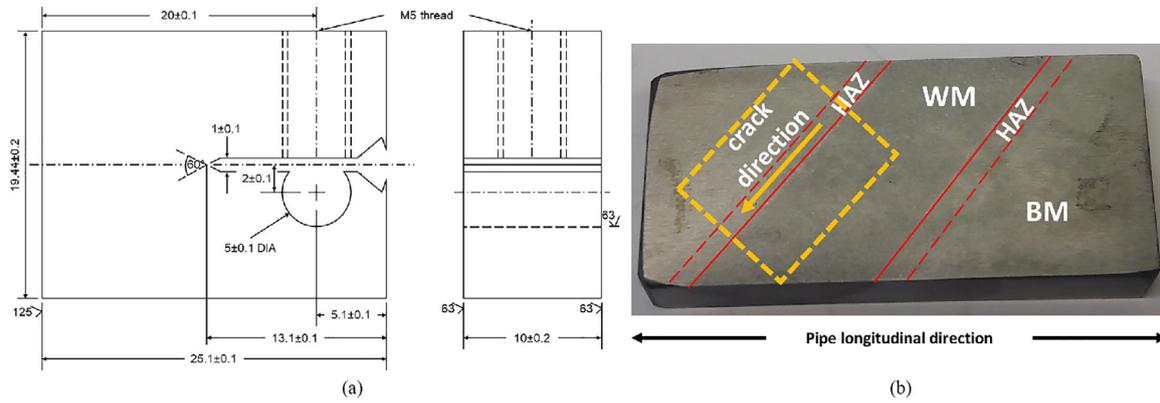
Specimen sketch and specimen location. (a) K_{IH} specimen geometry with a thickness (B) of 10 mm. (b) Position of specimens including HAZ.
